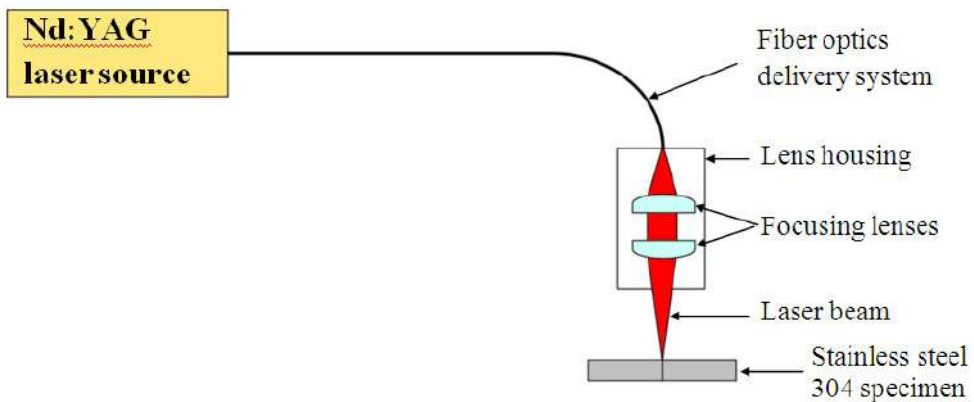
Nd:YAG laser experimental setup to produce a spot weld on stainless steel 304 specimen.
